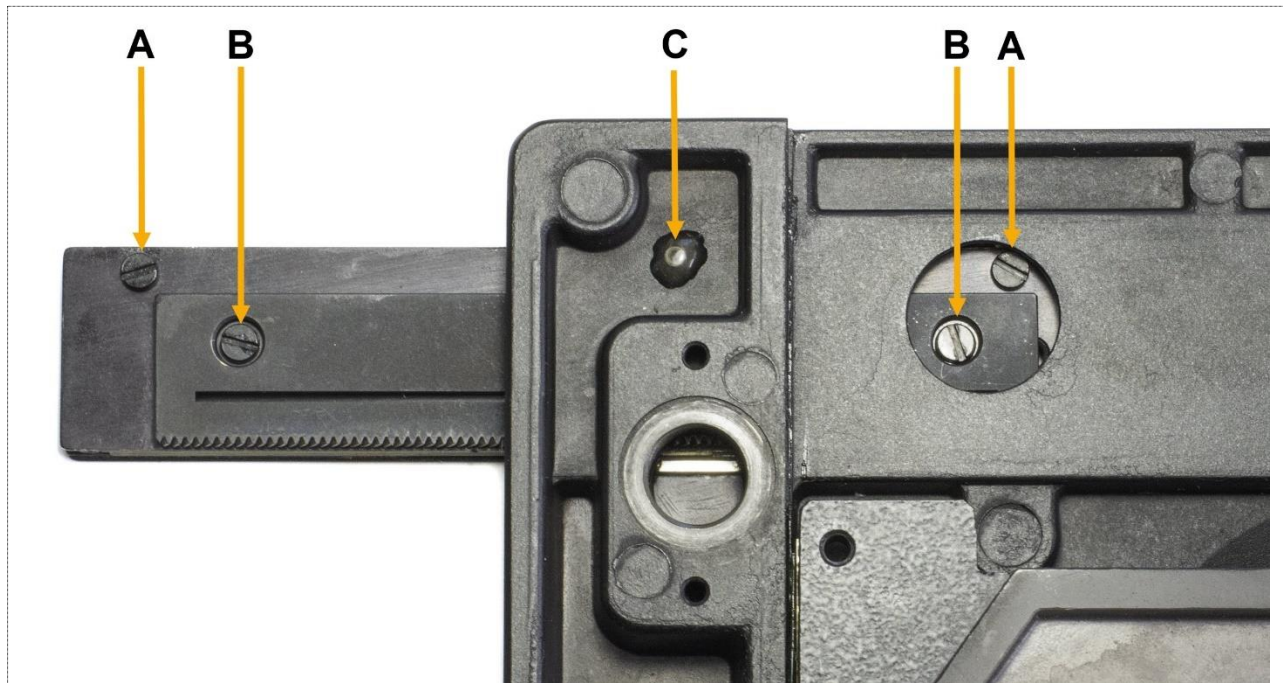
The x-axis slide pulled out to reveal four screws on its underside. The purpose of the circular hole in the stage base is to provide access to two of these screws.
